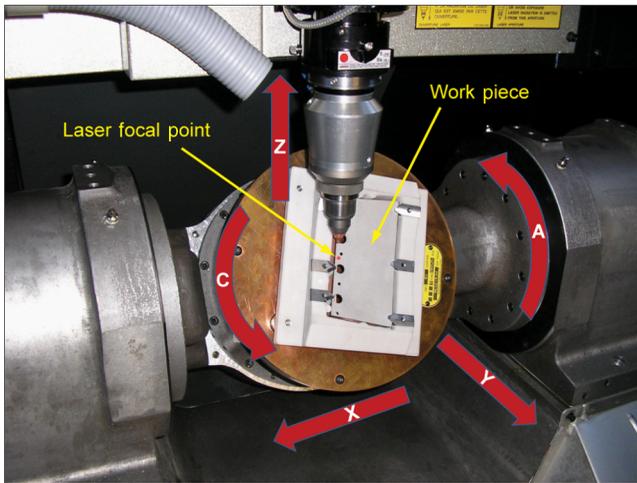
Configuration of a five-axis laser drilling machine tool.
